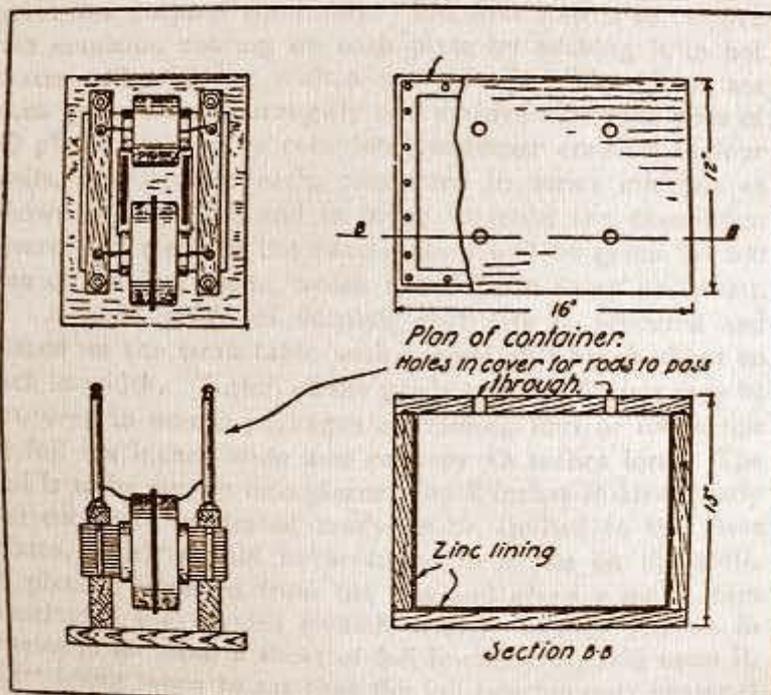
to 98 inclusive—Details of the magnetic leakage transformer
